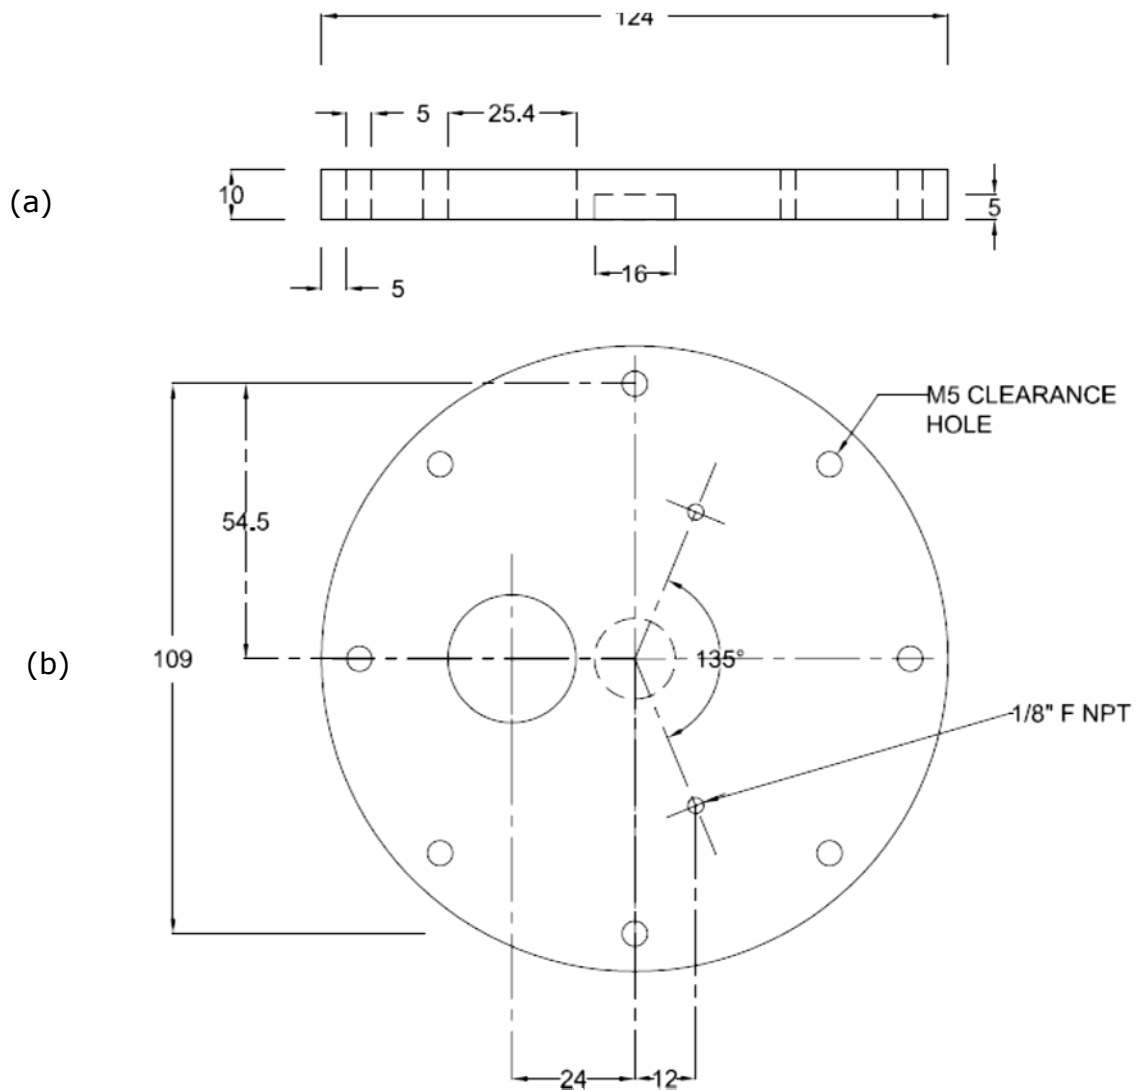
Engineering drawings showing (a) side elevation and (b) plan of photoreactor cover.
